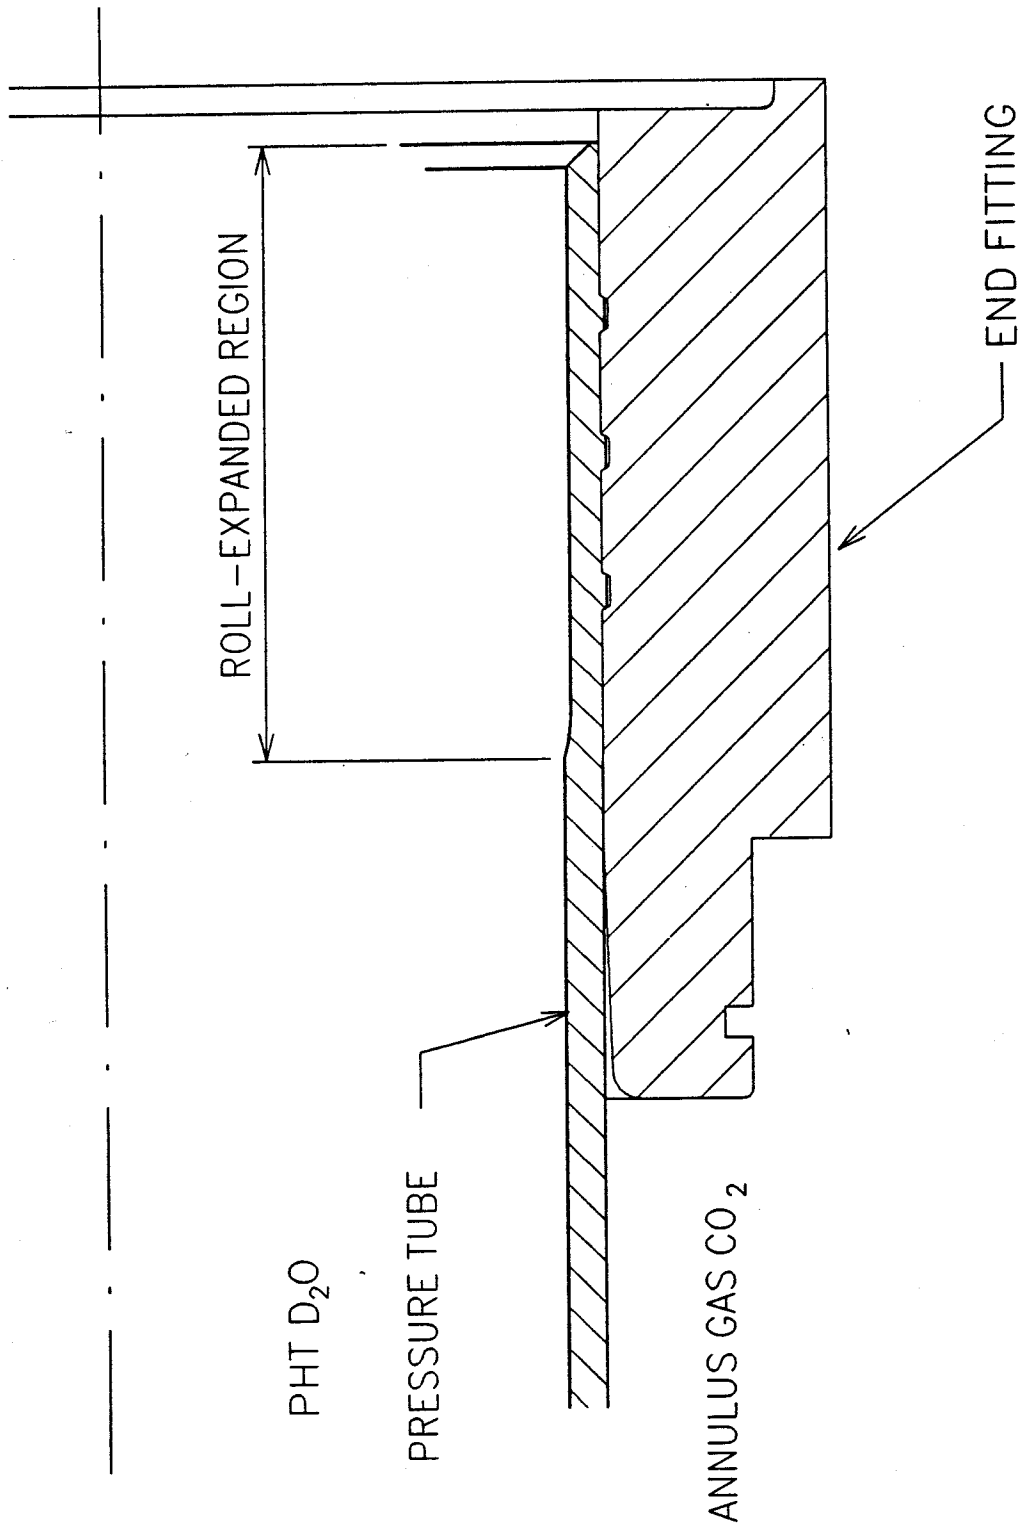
Pressure Tube-to-End Fitting Roll-Expanded Joint
